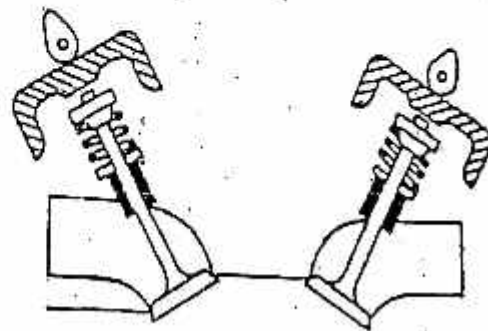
Double overhead camshaft-operated mechanism with inverted bucket type followers
